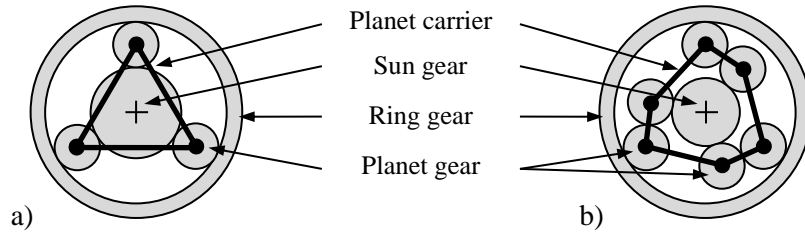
Configuration of a) simple PGS and b) PGS with idler planet gears
